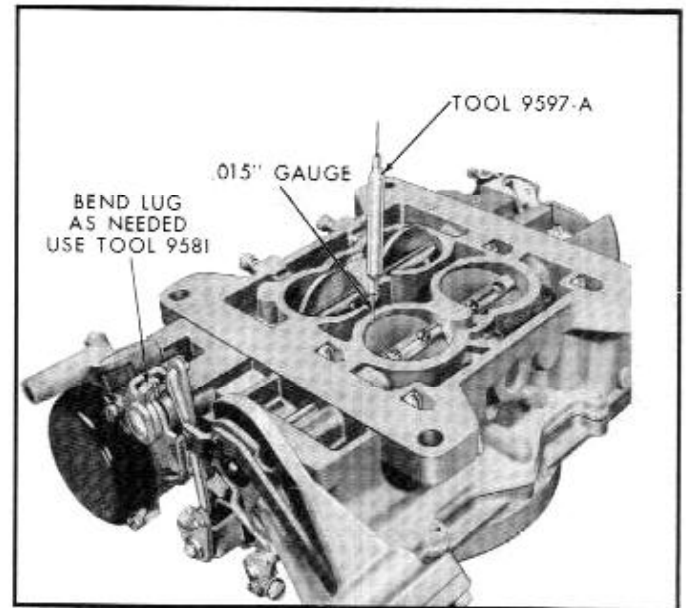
E-17—Primary Throttle Shaft Dog Adjustment — Rear Tang
